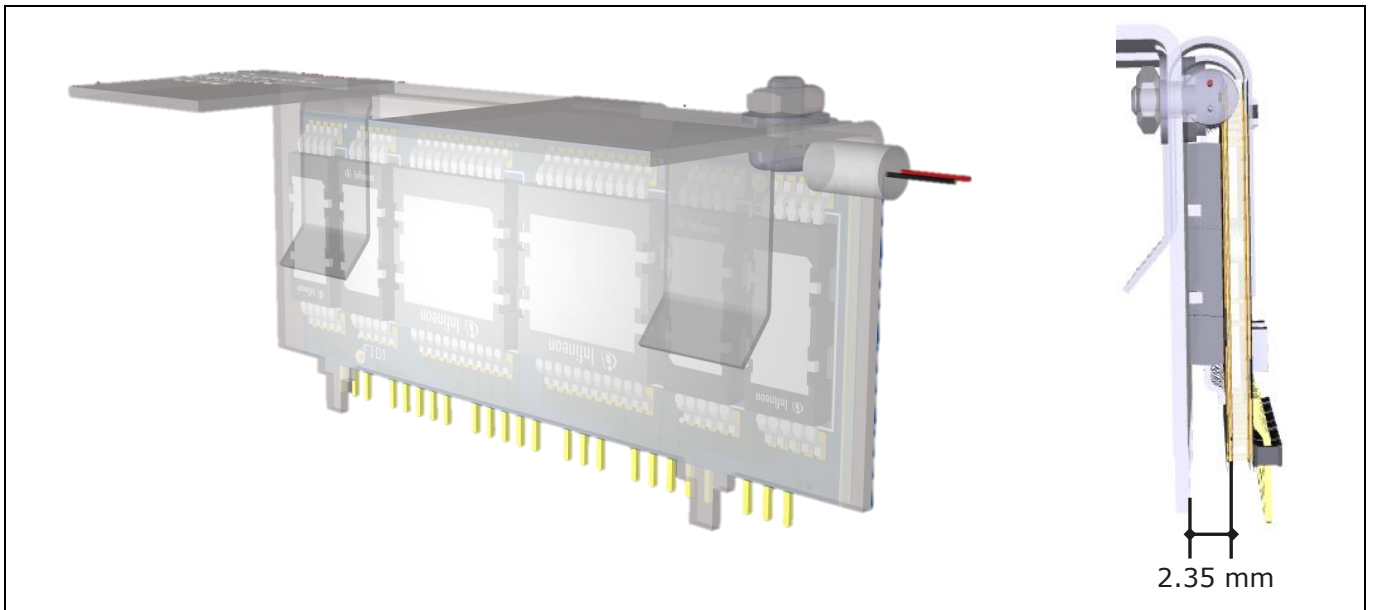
Heatsink mounting for the power board of EVAL_1K6W_PSU_CFD7_QD
